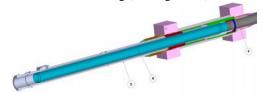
Schematic representation of the liner tube mounting inside of end fitting
